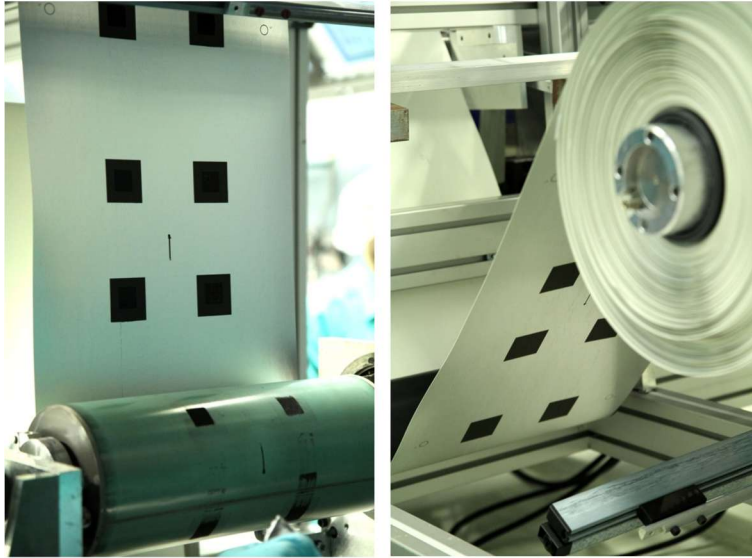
Photographs of the ROKO machine during the electrode printing.
